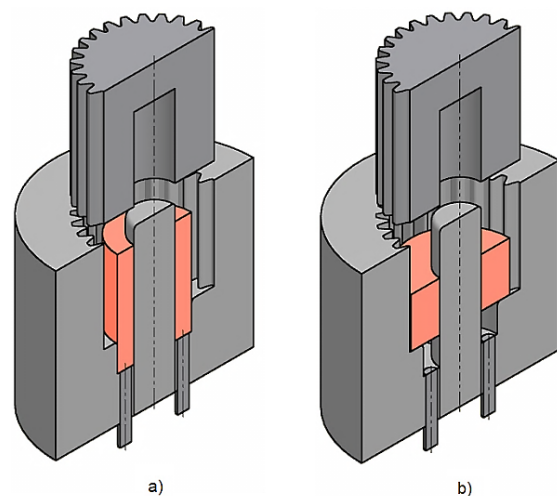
Design of the forging tool with possible alternatives of billet dimensions 3a), 3b)
